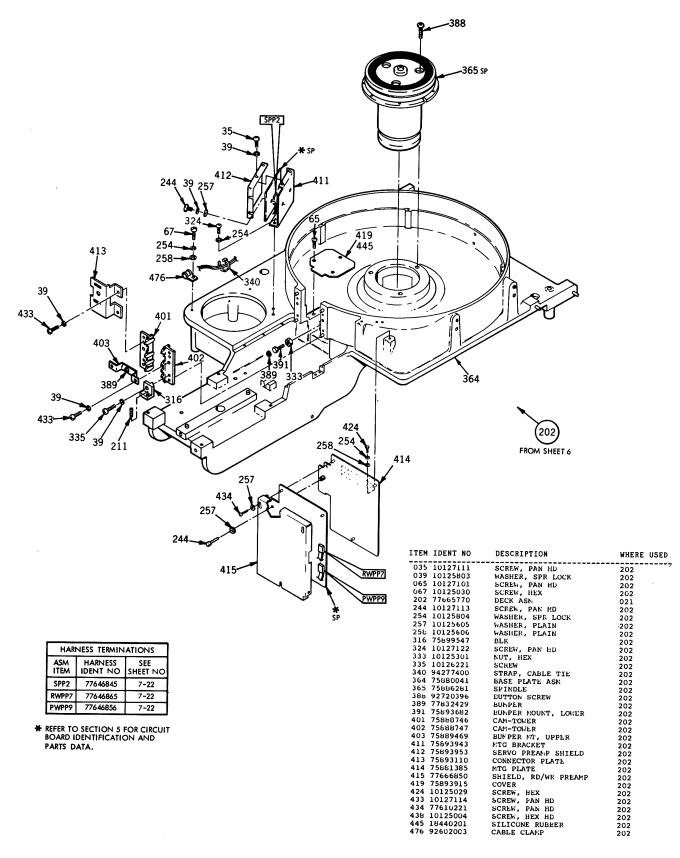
DECK ASSEMBLY (SHEET 1 of 3)
